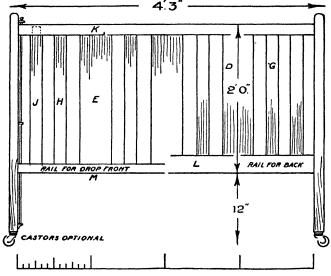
(at left) Front Elevation with Drop Side. (at right) Back Elevation.
